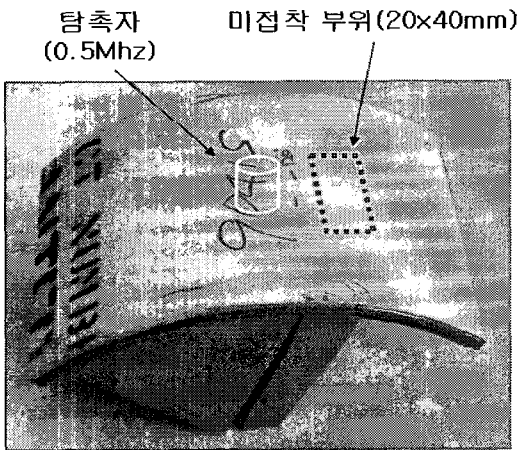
Test specimen for propellant/liner dis-bond of rocket motor
